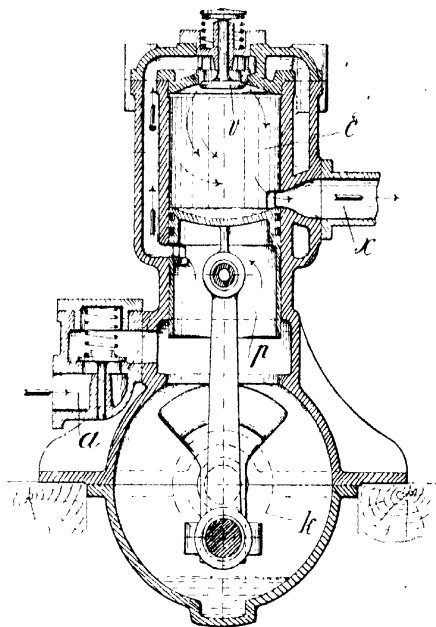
Two stroke engine, with transfer valve on cylinder end.
